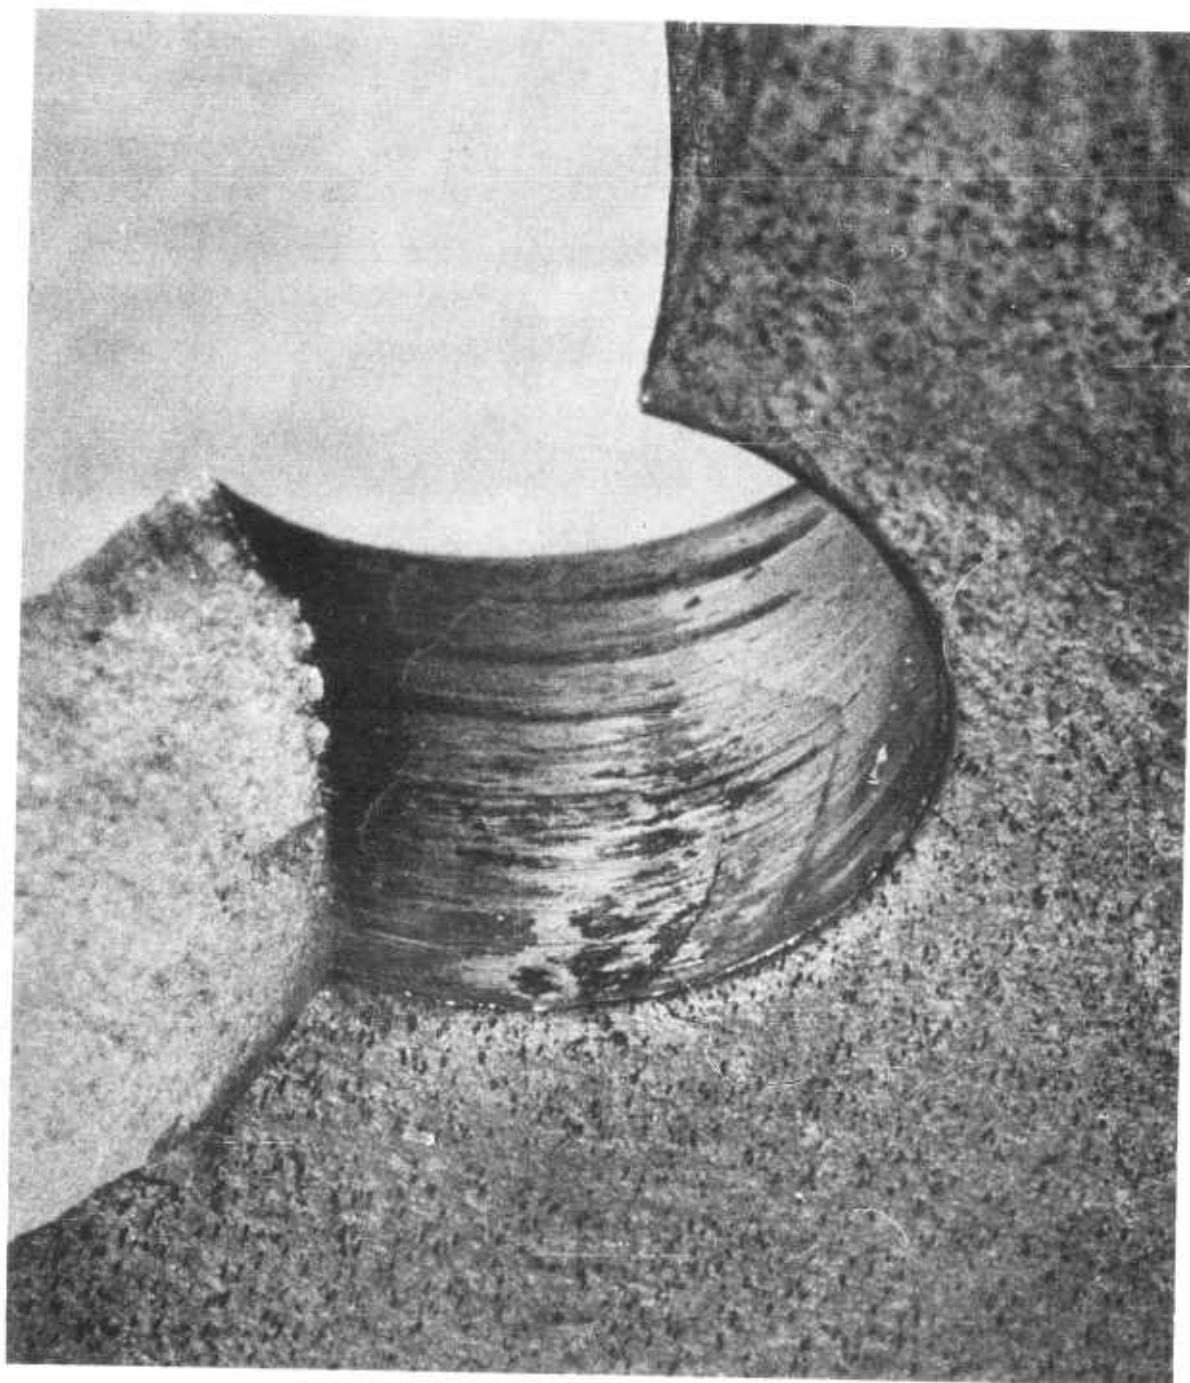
Rear Spar Fracture Area -- View of Crack in Burr
